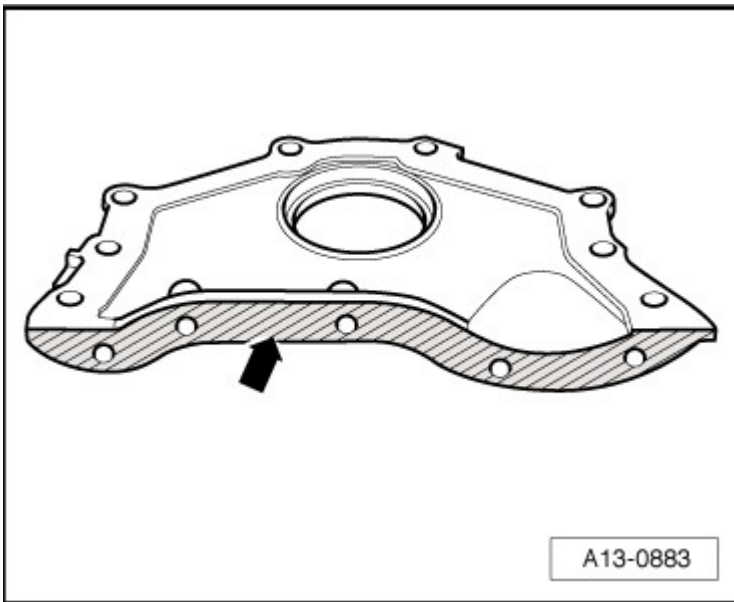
Lightly Coating Lower Sealing Surface Of Sealing Flange With Sealant
